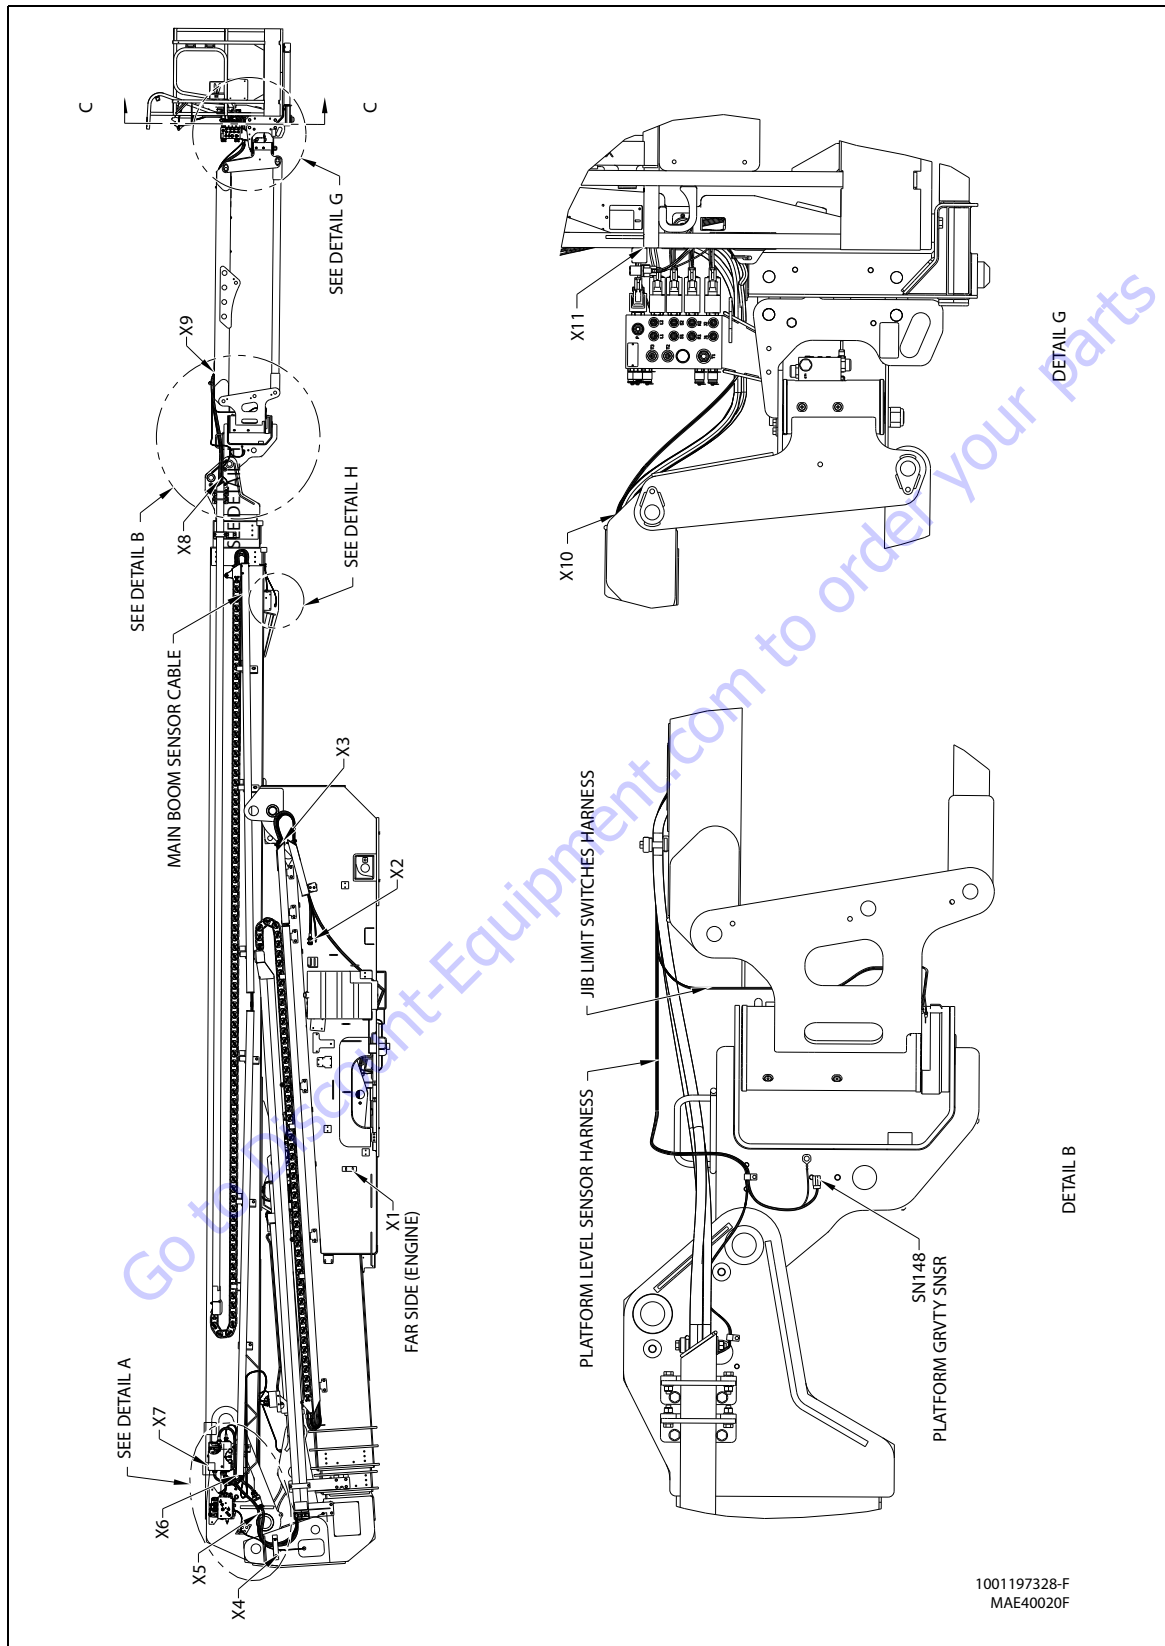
Boom Electrical Installation (SkyPower) - Sheet 1 of 6
